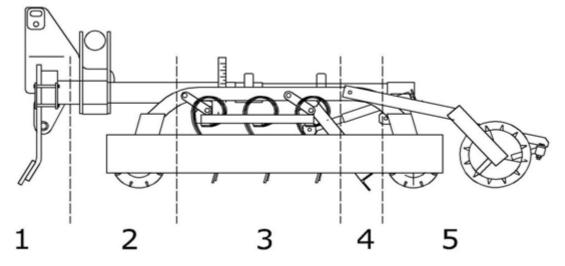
Working sections of the SHARP seedbed cultivator: 1- track eradicators, 2- roller Ø350 mm crumbling leveling, 3- teeth section, 4- leveling drag, 5- section of burnishing and crushing shafts Ø350 mm and pin Ø400 mm
